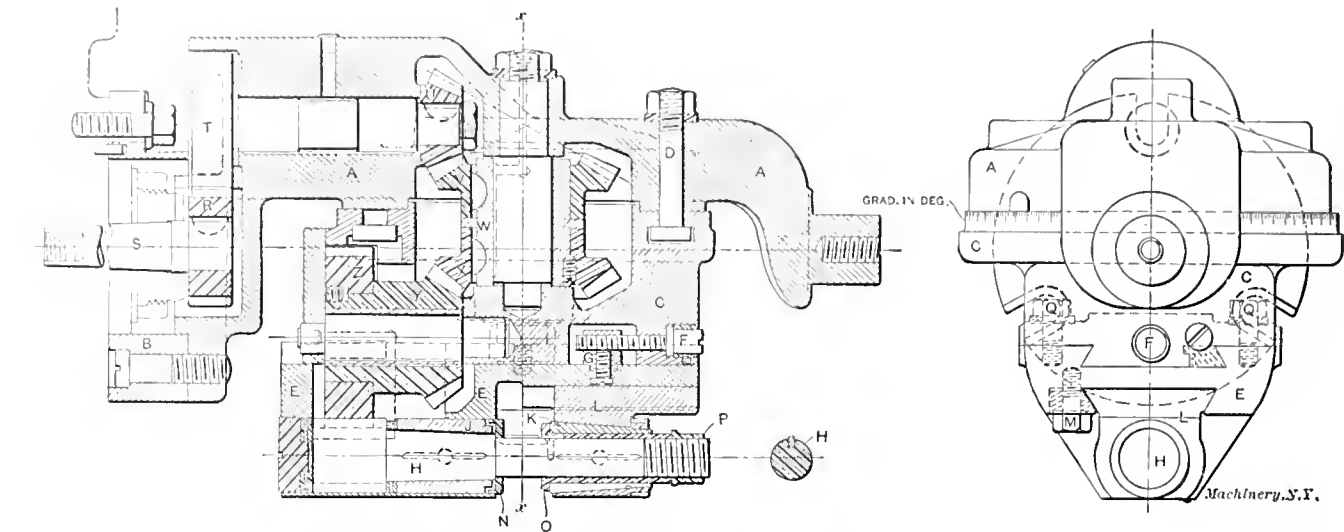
Details of Construction of the Spiral Gear Cutting Attachment.
